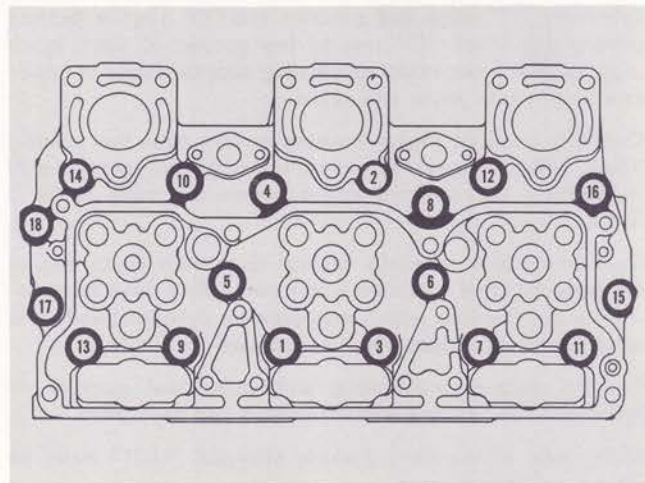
Cylinder head capscrew tightening sequence — GV12 5 $\frac{1}{2}$ " bore V41423
